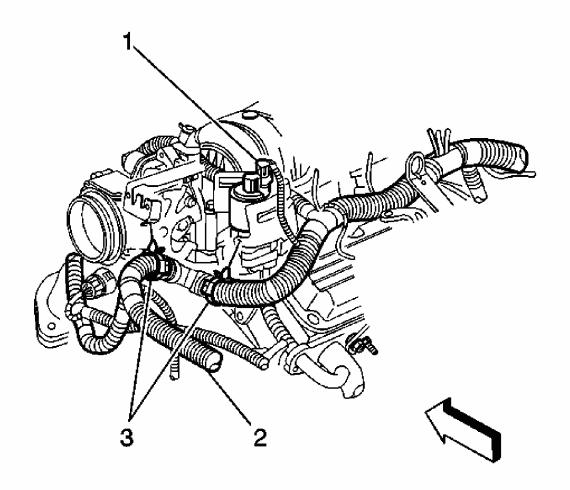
View of EGR Valve, Engine Harness Clips & Wiring Harness Courtesy of GENERAL MOTORS CORP.
